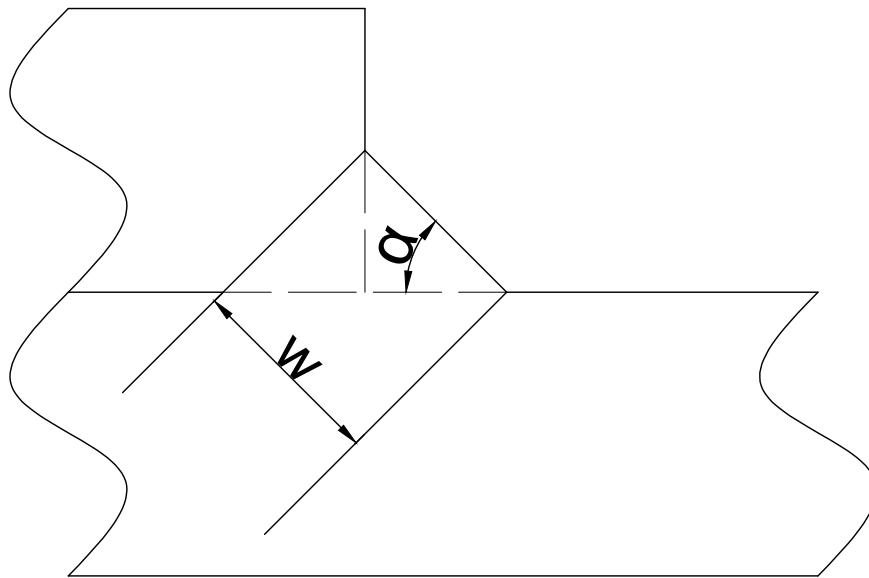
Model for optimization of weld angle and weld thickness
